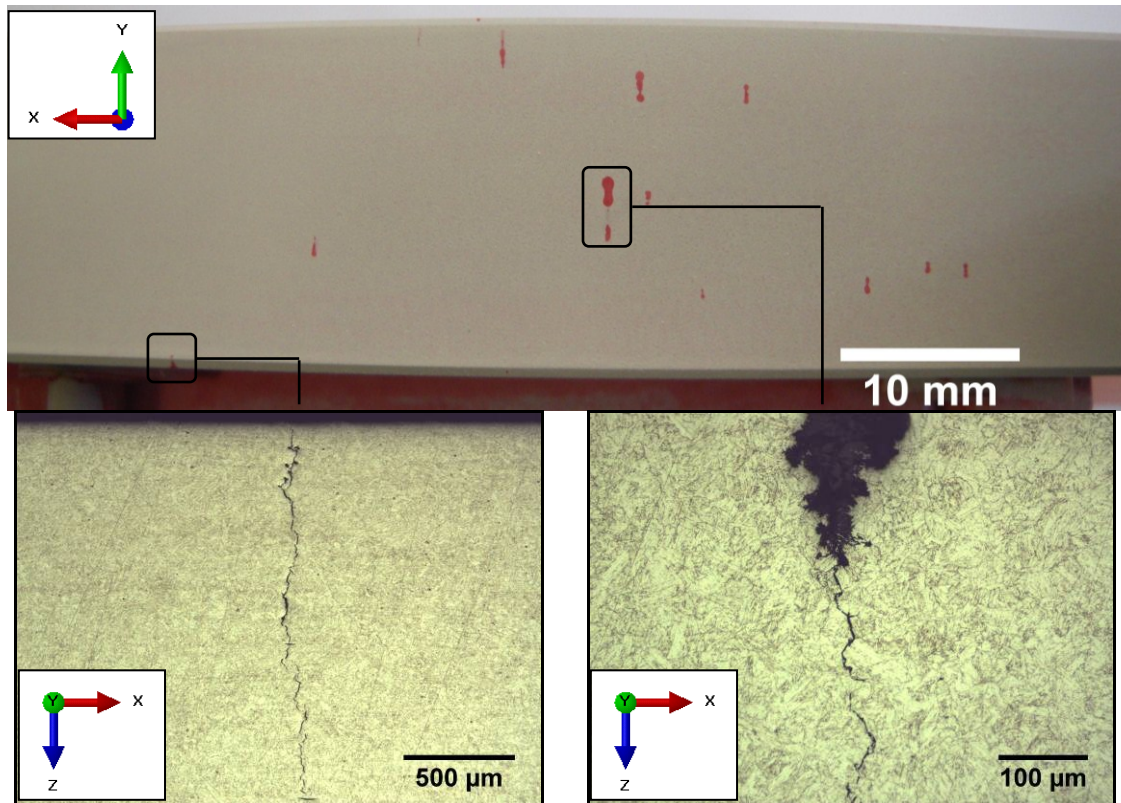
SSC cracks located on the tensile surface of fully-machined specimen P7 (Specimen tested in Produced Water at 5 °C and 69 mbar H₂S). Cracks are distributed over the entire test face
